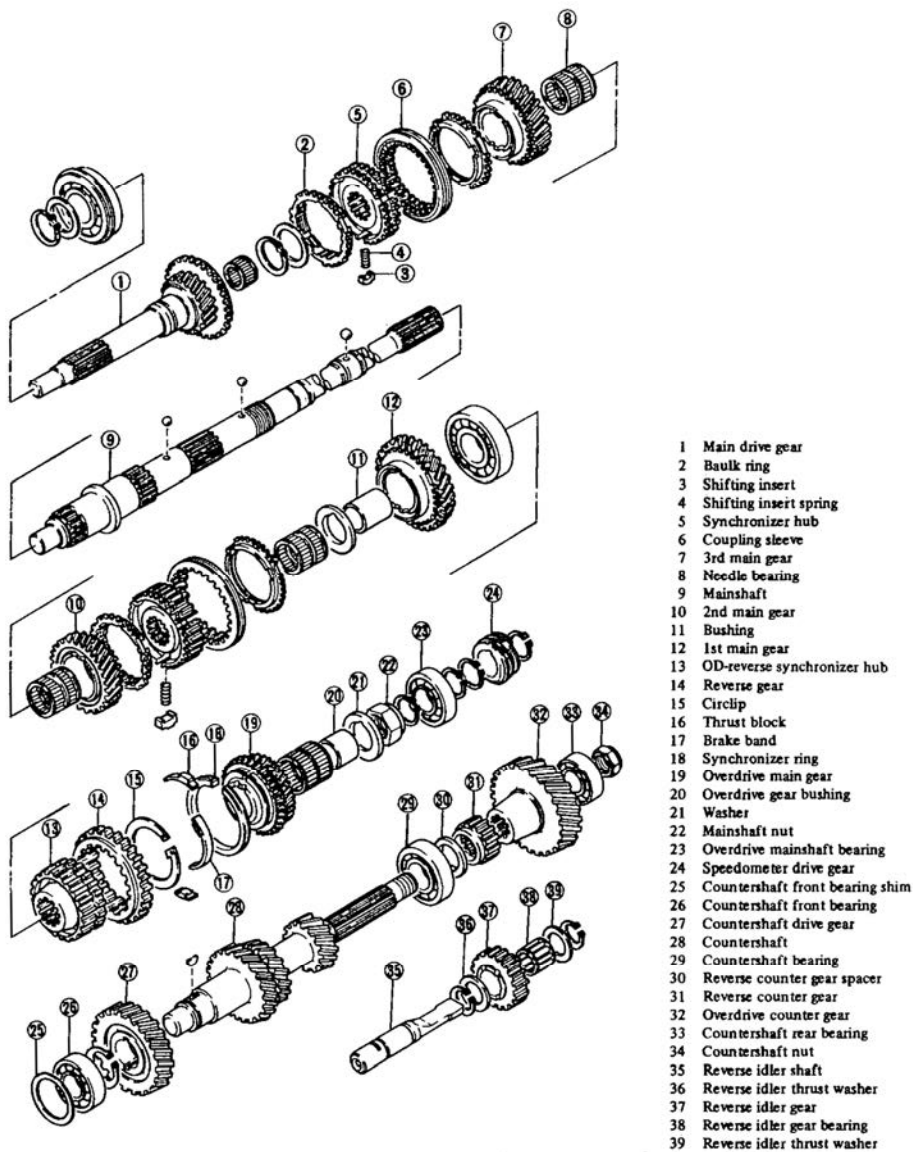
Exploded view of the FS5W71 main and countershafts, including gears, synchronizers, and bearings.
